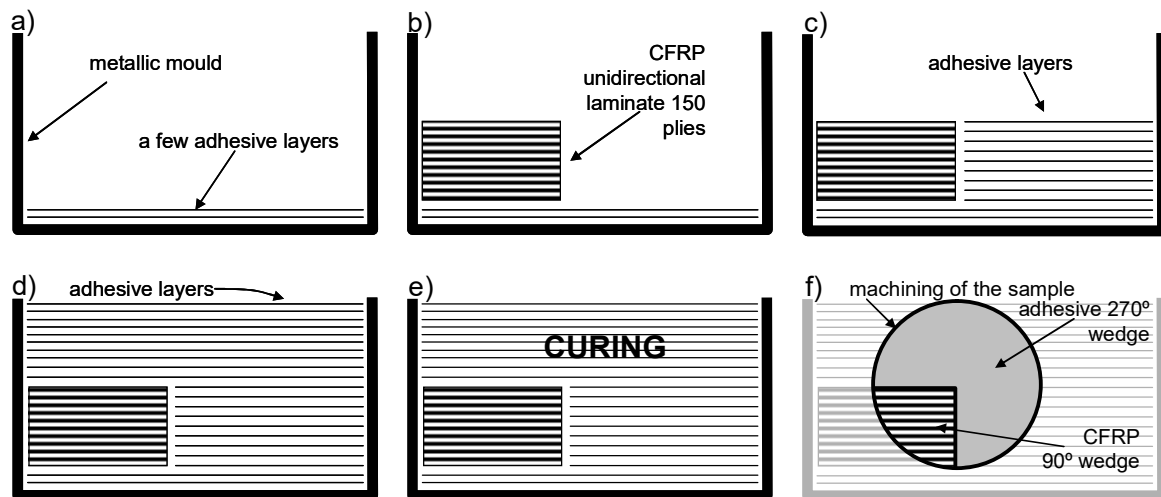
Scheme of the sample fabrication, a) adhesive layer in the mould, b) cured 150-ply CFRP laminate, c) adhesive layers to complete laminate thickness, d) additional adhesive layers, e) autoclave curing, f) machining of the Brazilian disk sample.
